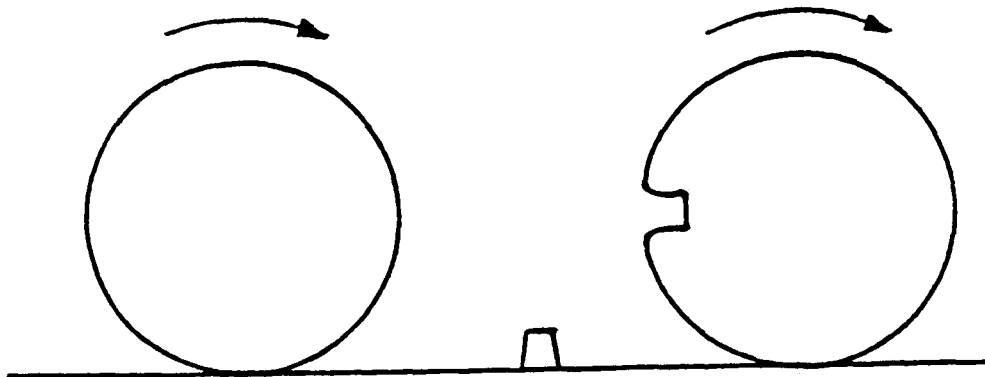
Wheel Rolling Over a Rack Tooth Forming the Tooth Profile
